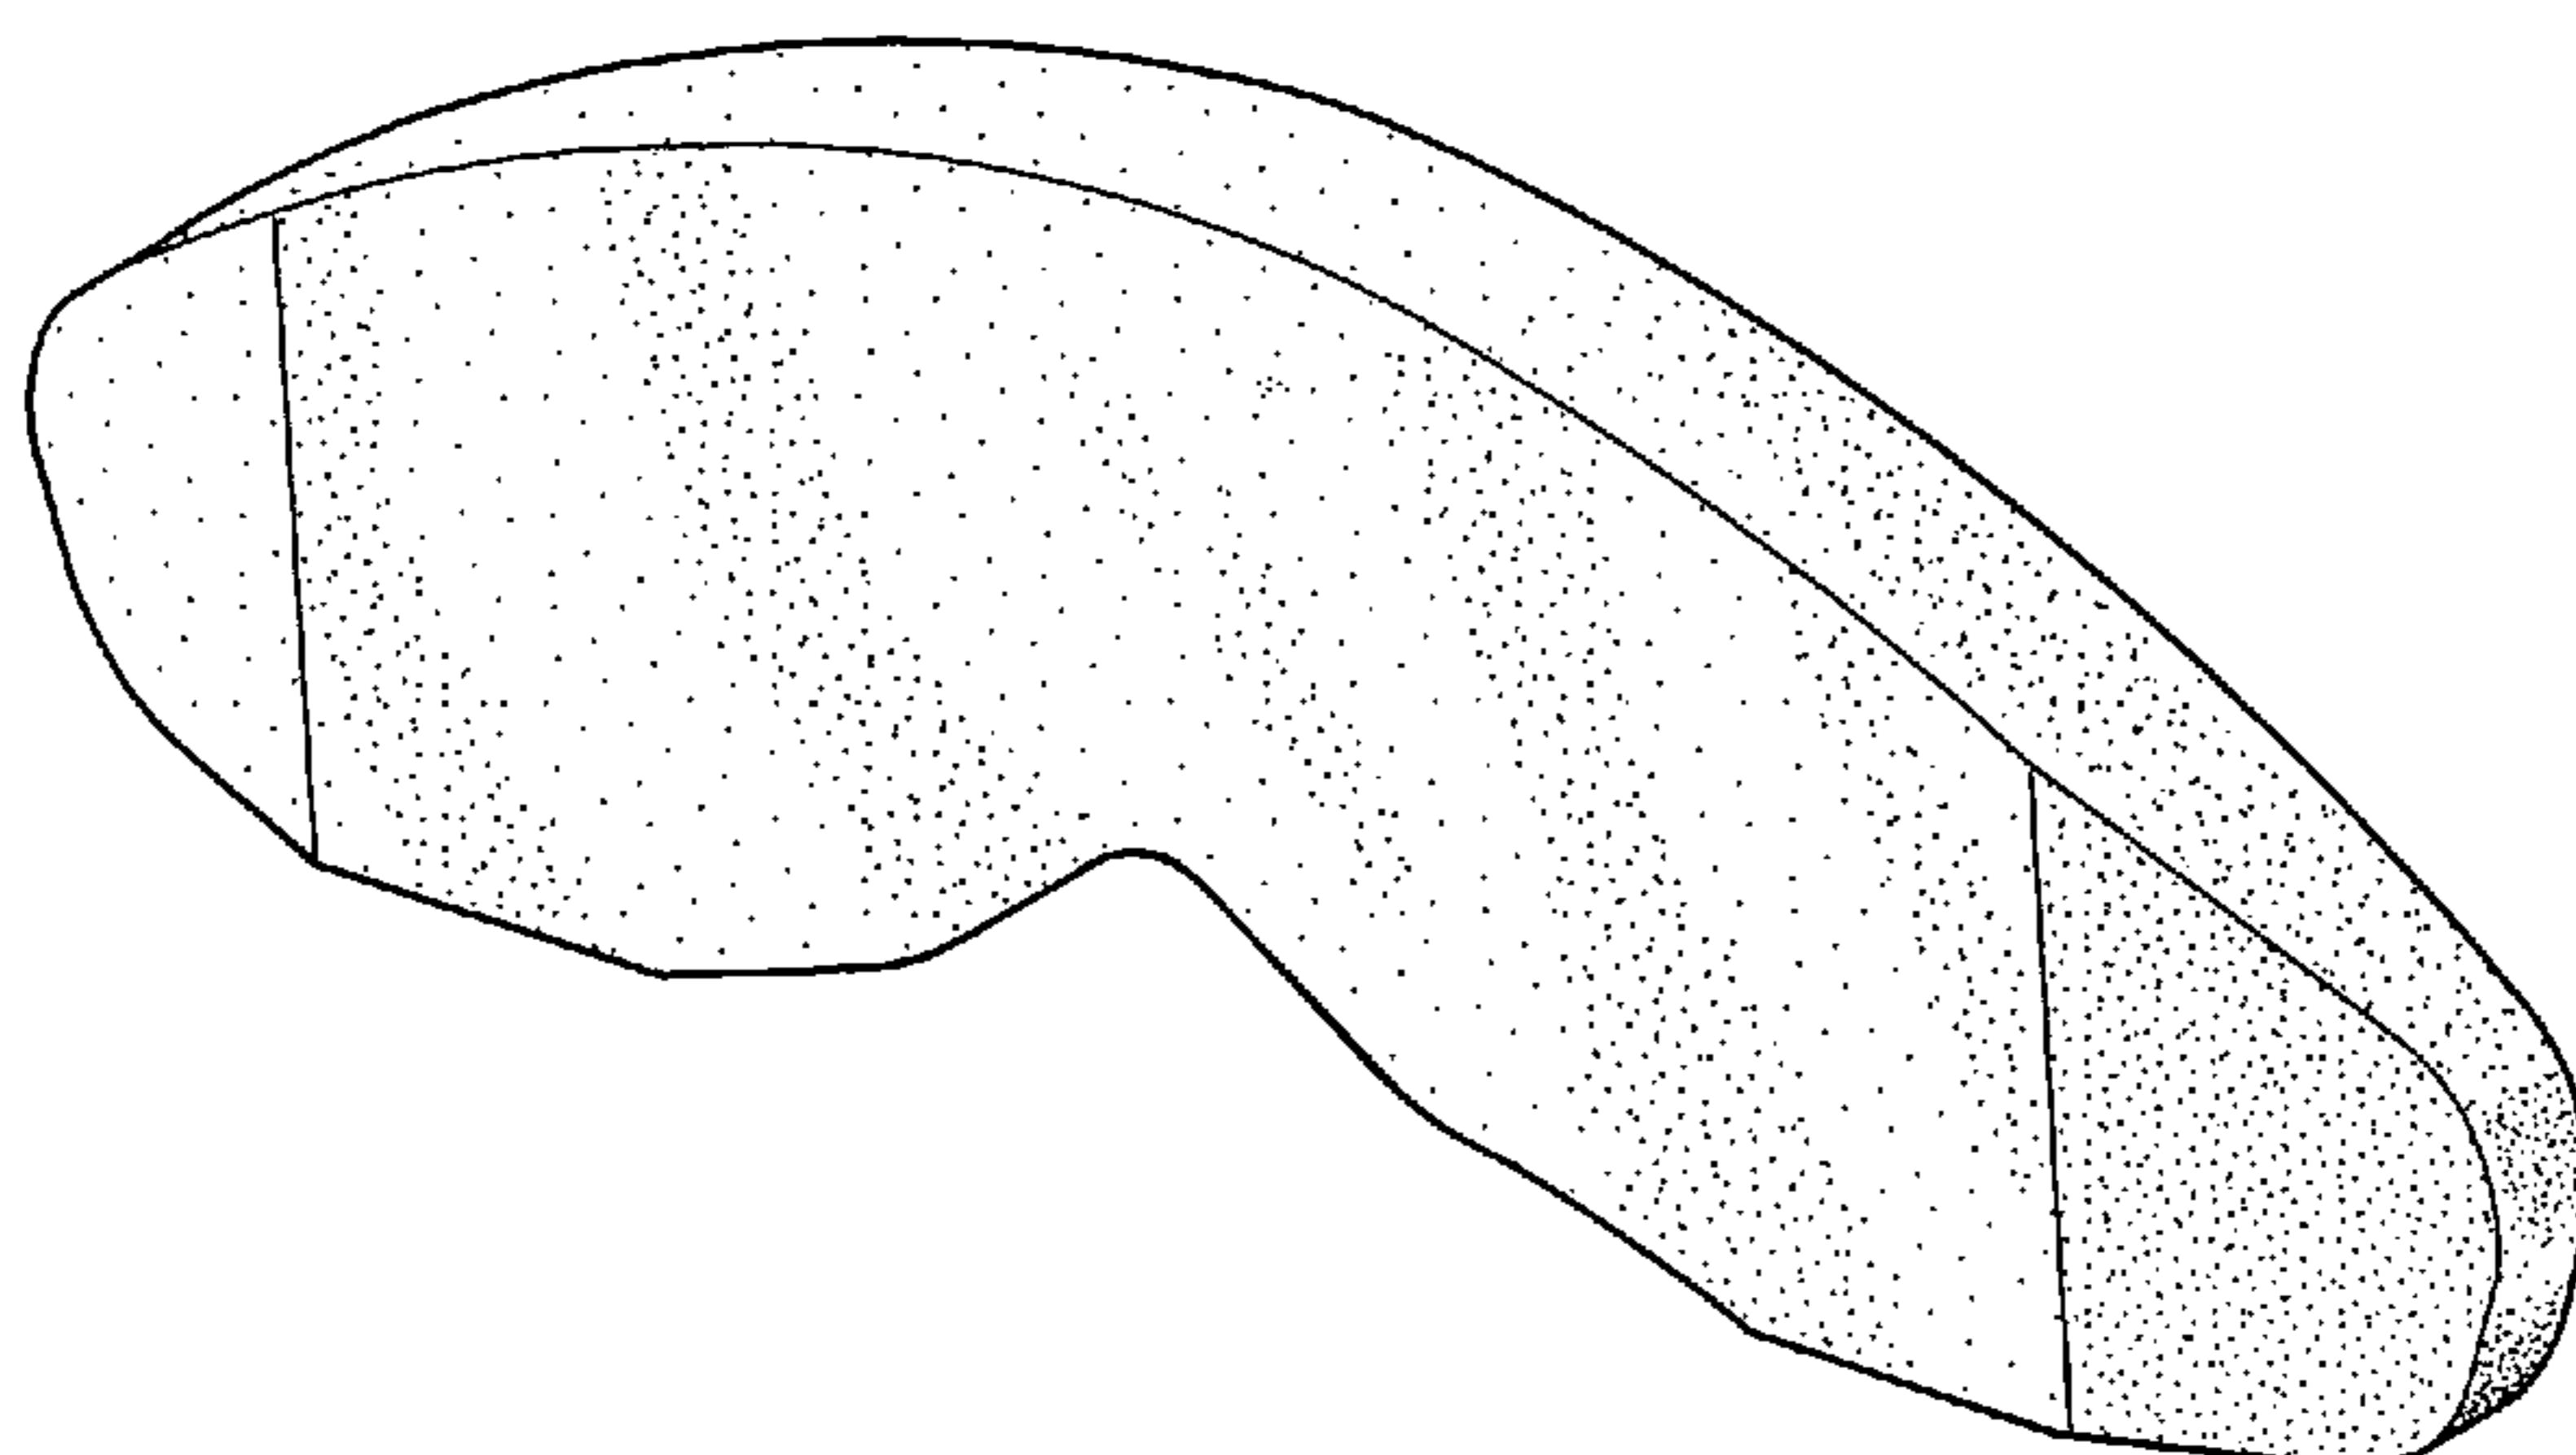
is a perspective view of an exterior surface configuration of a brake friction pad;
